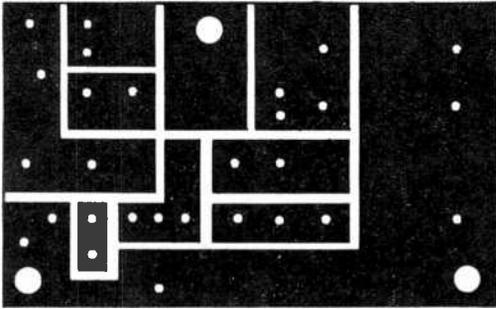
Actual-size foil pattern for trigger circuit. Three large holes are for chassis mounting.
